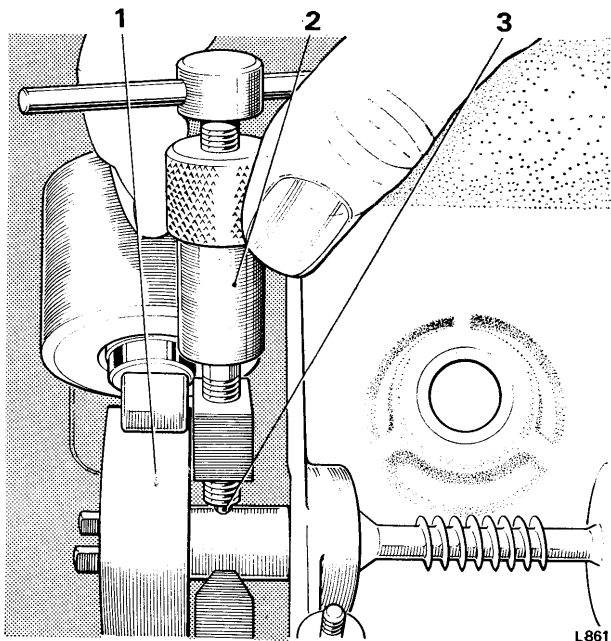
FITTING THE BRAKE DRUM ROLL PIN (EARLY CARS)
